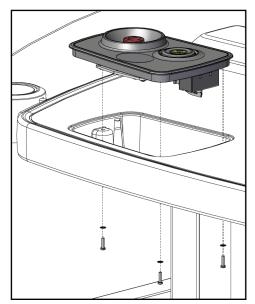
Removing existing E-Stop/x-ray button module (series II UAWS version shown)
